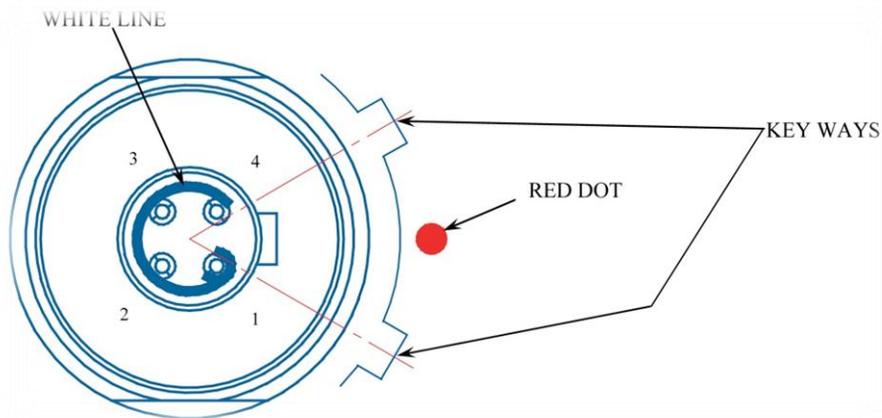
Rear View of LEMO socket EGB00304CLL. (This is the view of the solder buckets and the red dot marker and key way positions indicated for clarity.)
